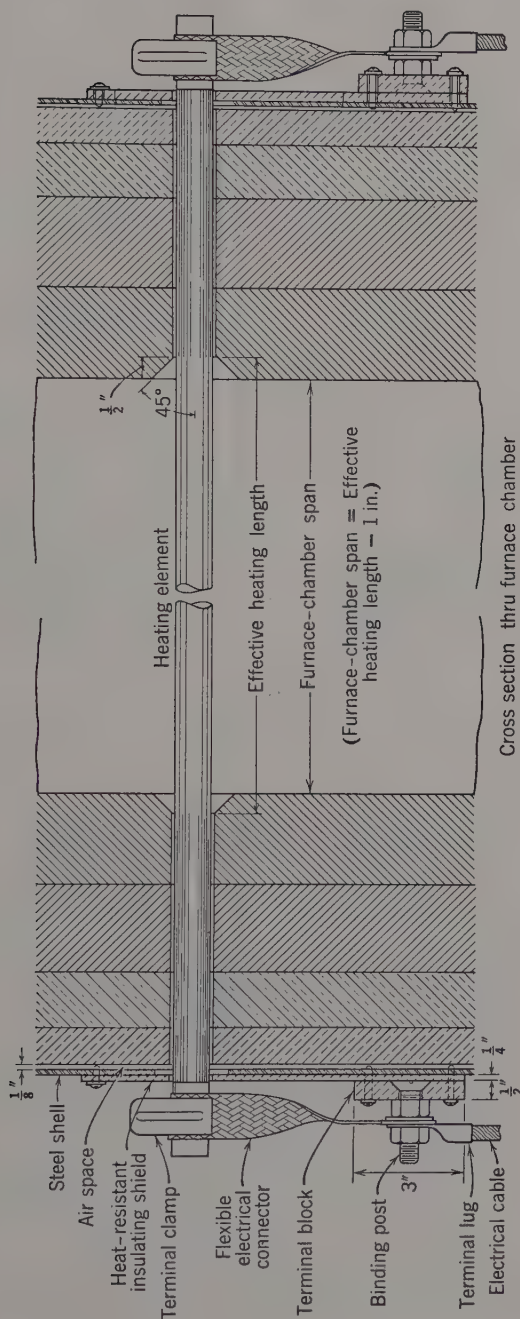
Silicon-carbide heater, mounted horizontally. Courtesy of Carborundum Co.
